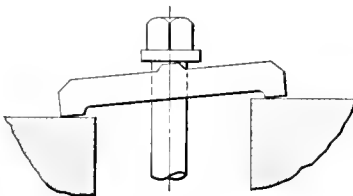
Action of Clamp shown in Fig. 38 when used to clamp Work which is not Level with the Clamping Surface.
